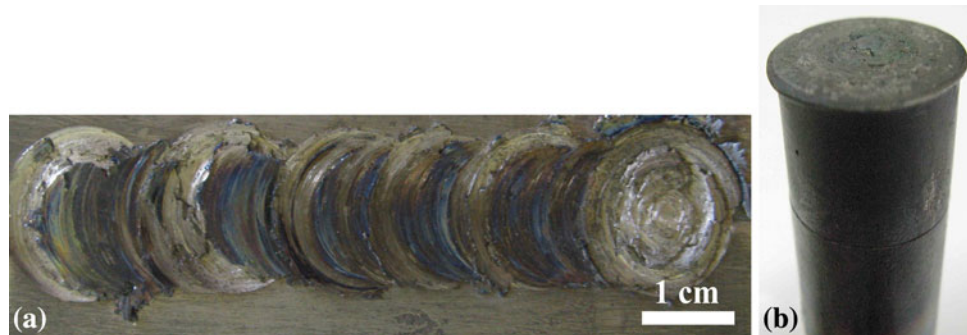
(a) Photograph made from the joint formed made under condition 1; (b) Used tool made under condition 1 at the end of the FSW
